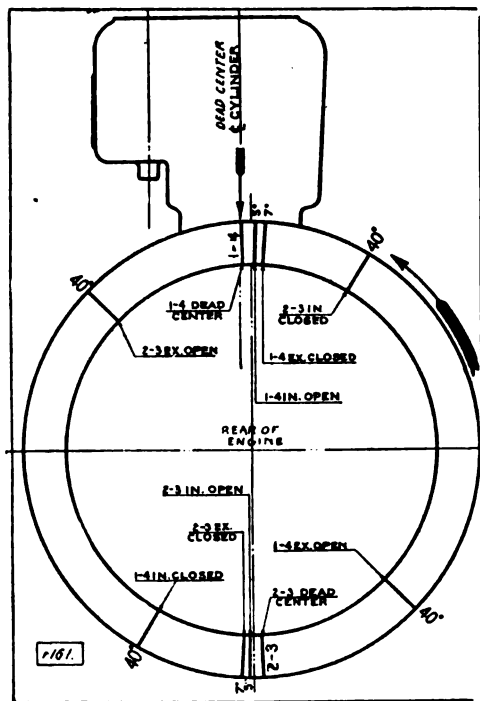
An example of valve timing marks on the fly wheel of a four cylinder engine. See text for checking valve timing from these marks. View from rear of engine. Note it turns to the left.
